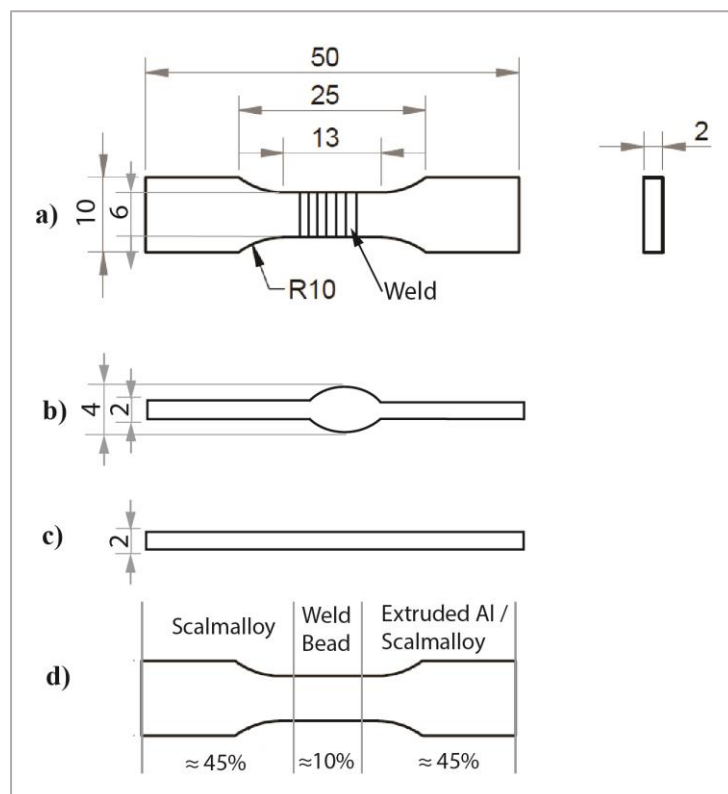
Geometry of tensile test specimen showing dimensions. Side view of b) as welded cross-sectional view and c) post machined cross-sectional view and d) proportions of Scalmalloy, extruded Al alloy and welded metal over the entire length of the sample, where the percentages refer to the approximate proportions of each material contained in the sample - (units are in mm)
